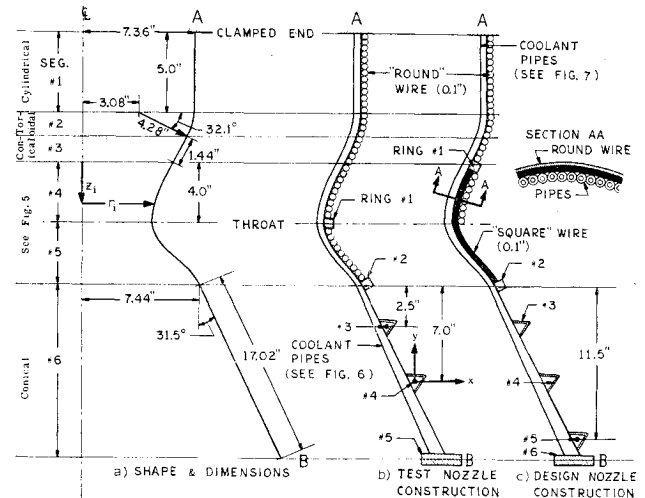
Meridional geometry and wall construction of test and design nozzles.
